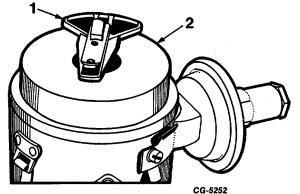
Distributor Rotor and Dielectric Shield (Dust Cover)
